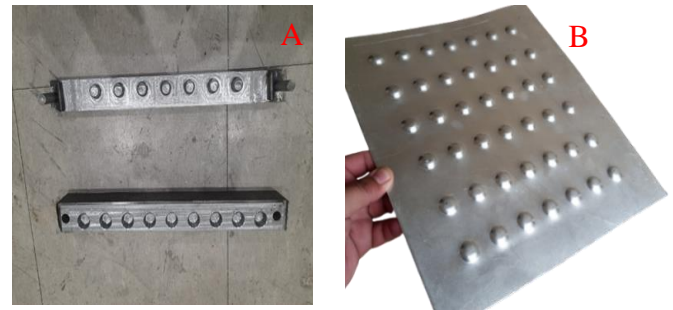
Dies manufactured and sheet dimpling; (A) Manufactured male and female dies, (B) Pressed dimple sheet by hydraulic press machine
